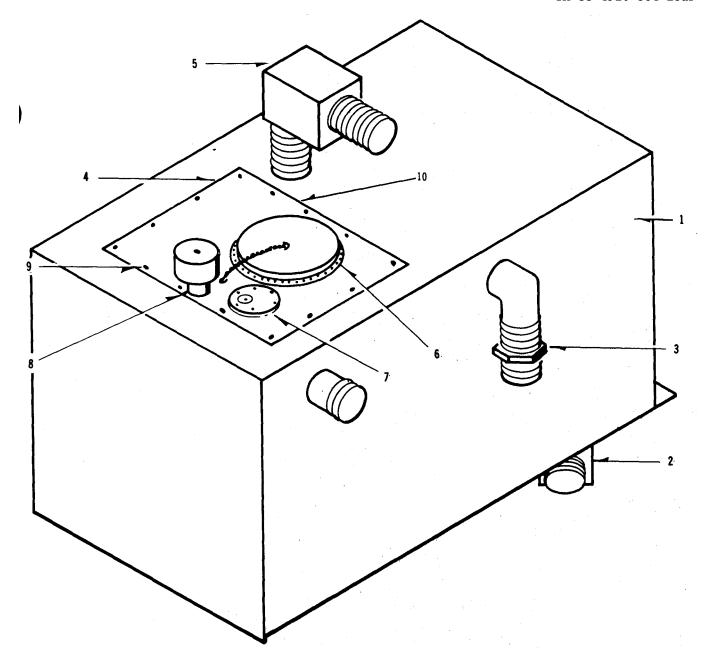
Reservoir, Hydraulic Tank Assembly
